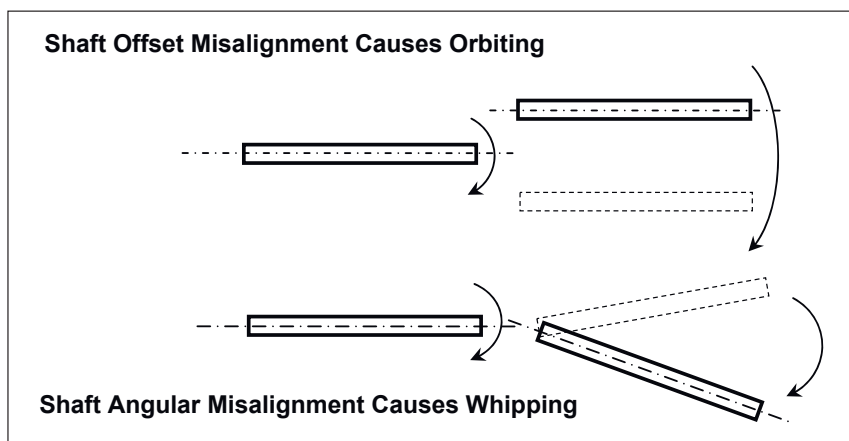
Inaccurately Aligned Shafts Destroy Machinery.
